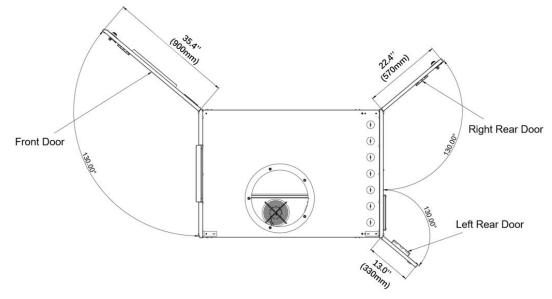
Space required for the rear doors and the front door (IP-Rated Electronic Locks & Swing Handle Keyed Locks)
